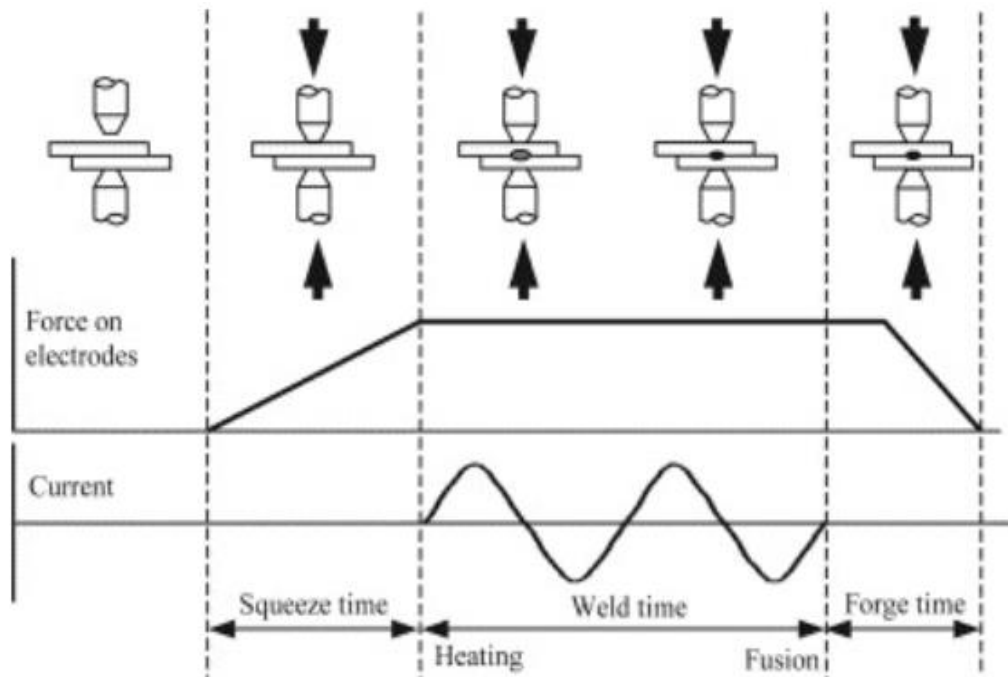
Basic Single Impulse Welding Cycle for Spot Welding [1]
